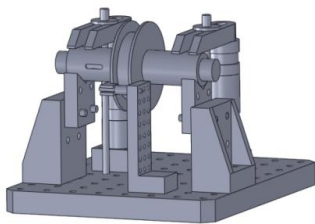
Modular device – clamping with screws and manual actuating [12].
